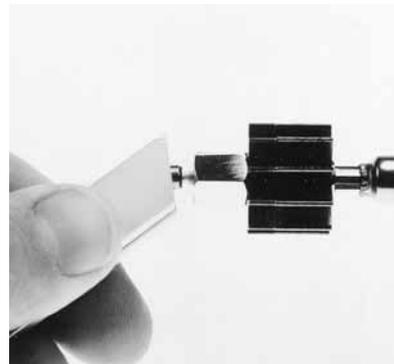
Tubing end pushed against the flat surface of the flanging tip.
